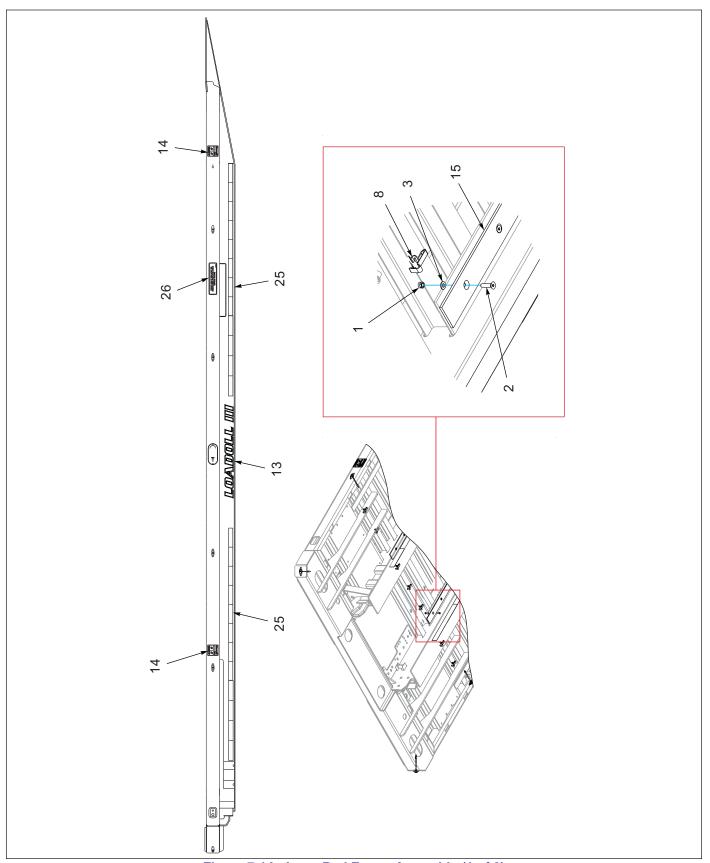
Long Bed Frame Assembly (1 of 2)
